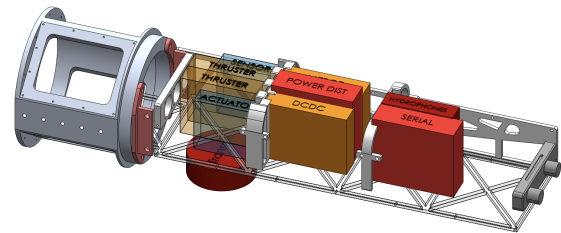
Isometric view showing all eleven boards housed in Scylla's main pressure vessel.
